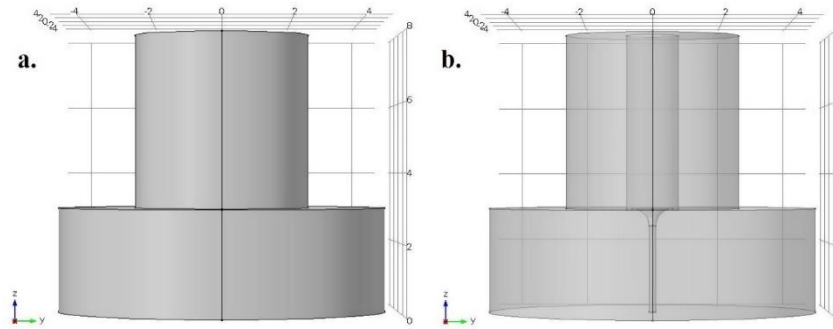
Schematic illustration of front view of piston lower part type 1, (a. solid view, b. transparent view)
